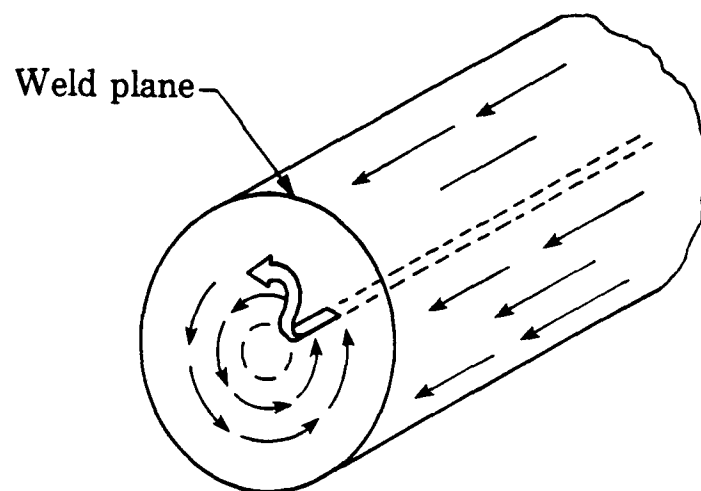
Schematic illustration of metal flow during inertia-friction welding (Ref. 6).
